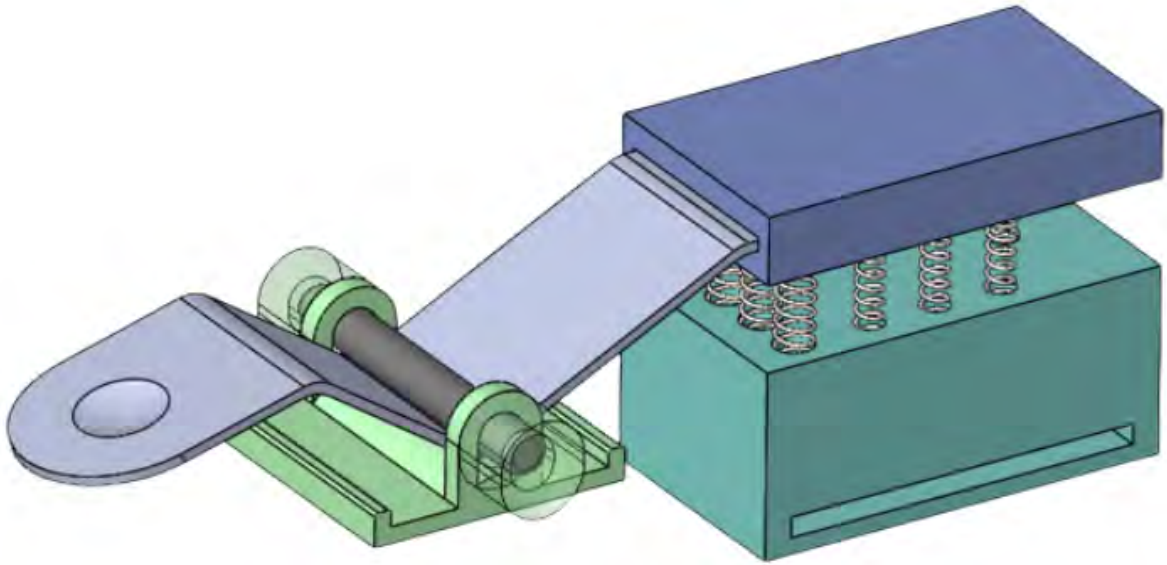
CAD assembly of DexPlay, which was all 3D printed excluding the metal beam. The metal beam will need to be shaped according to the user's hand shape and size.
